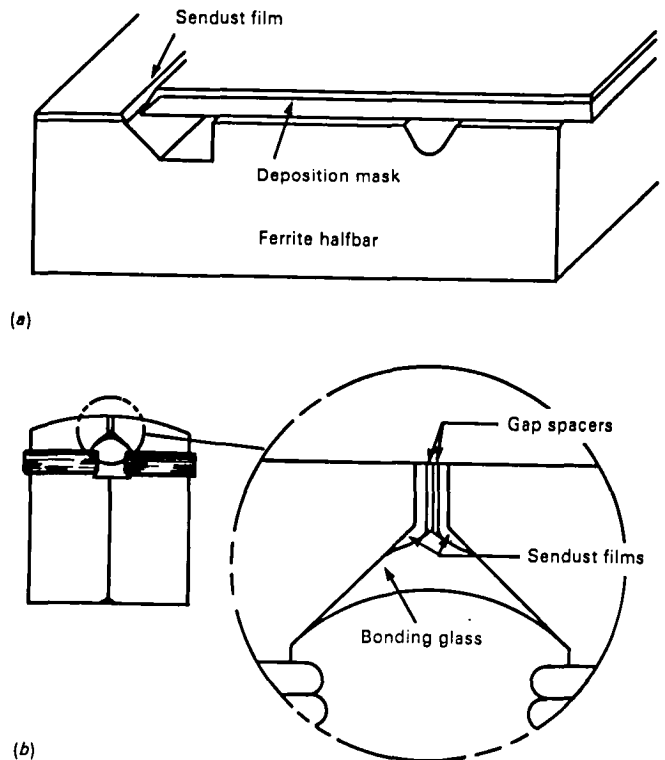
Construction of MIG head. (a) Deposition geometry. (b) Finished head.
